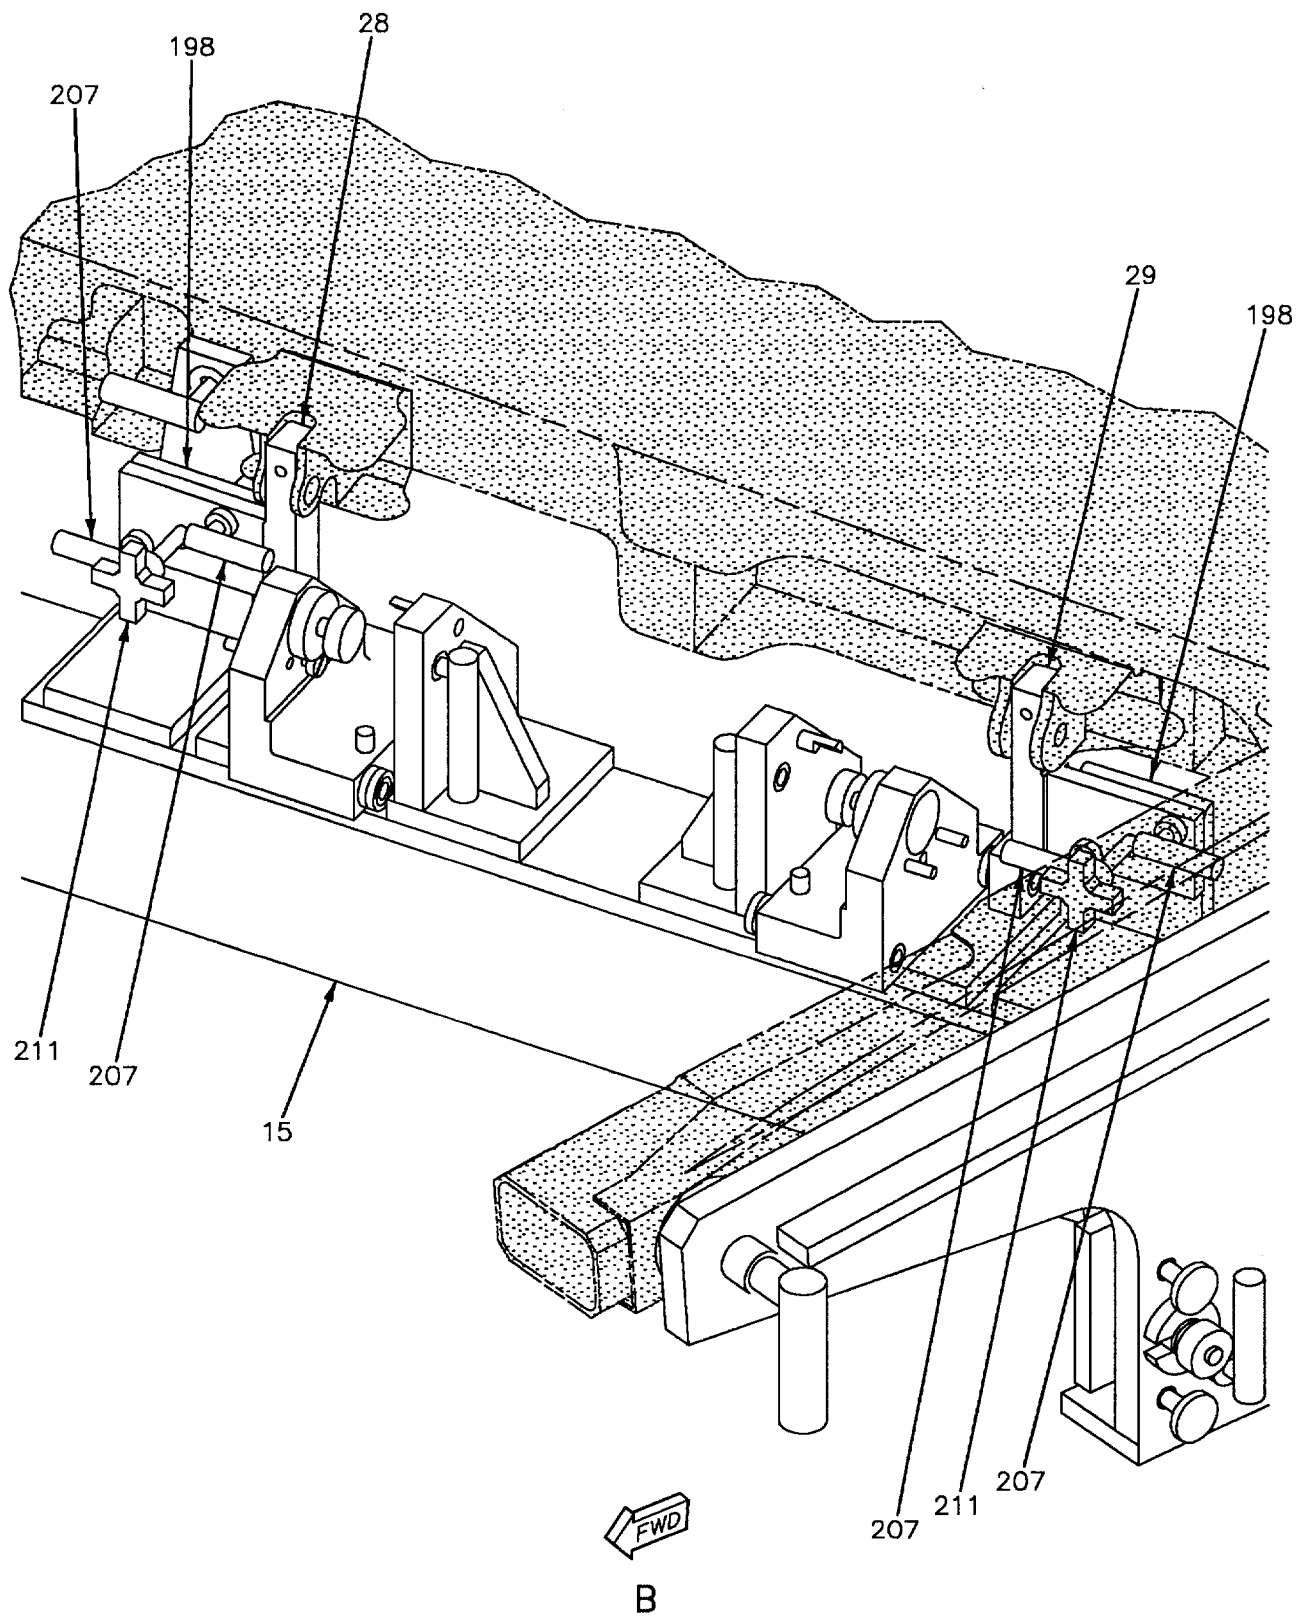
Inspection of Hinge Halves, 74A150678 and 74A150679 (Sheet 2)
